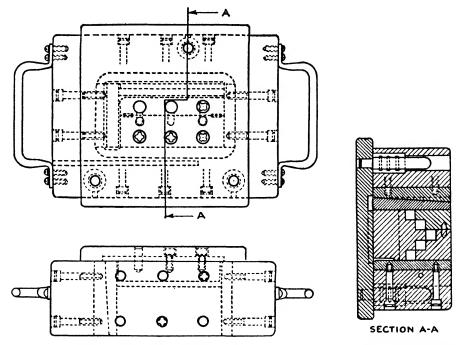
Five-bar, single-cavity positive mold for ½ in. by ½ in. by 5 in. test specimens.
